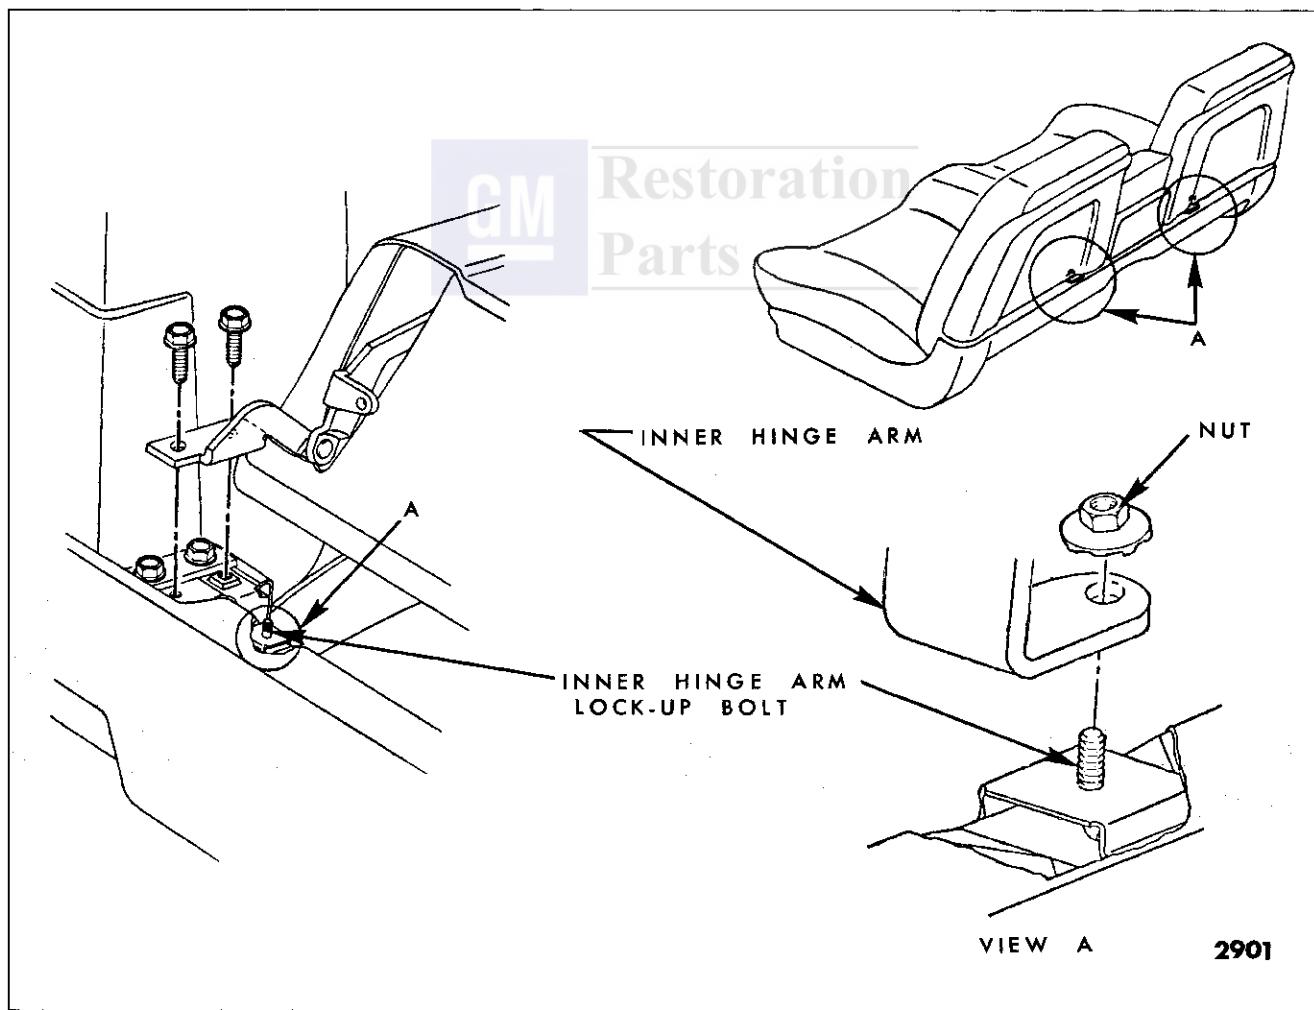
Strato Front Seat Back Assembly (Right or Left) Full Width Seat - 16639 Styles
